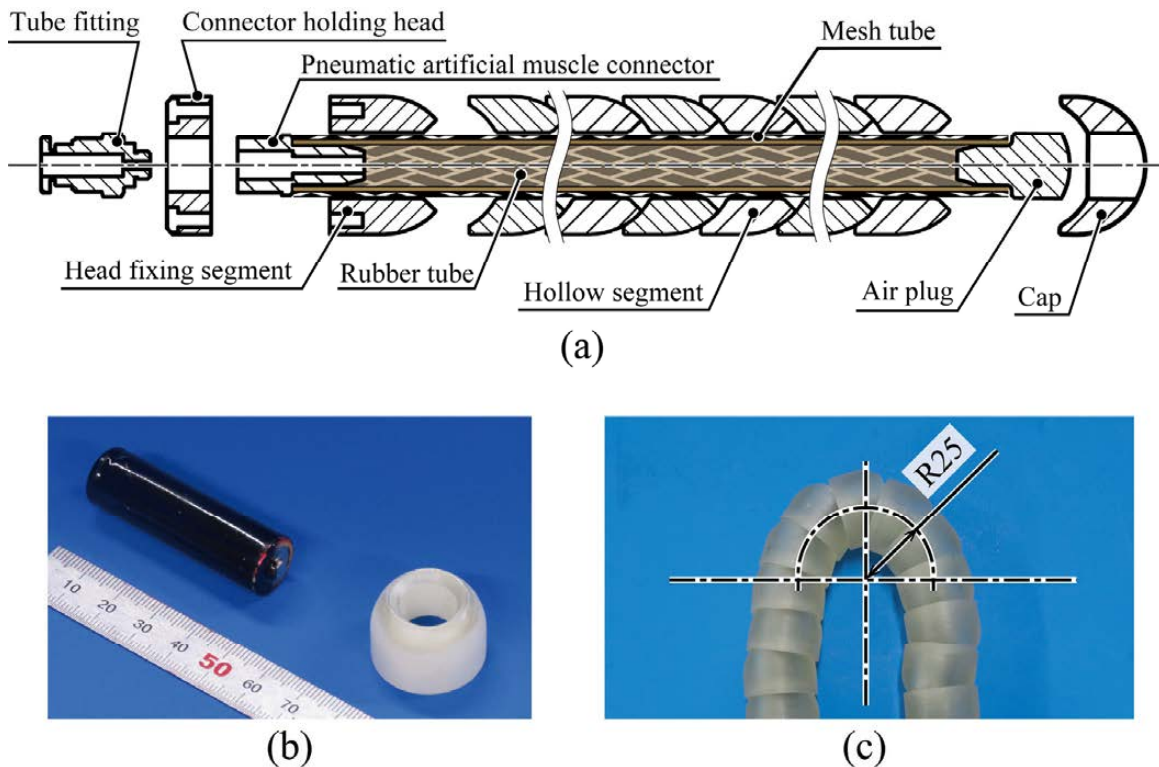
Prototype of the proposed method. (a) Assembly method of the linear structure. (b) Fabricated hollow segment. (c) Maximum radius of the curvature of the prototype.
